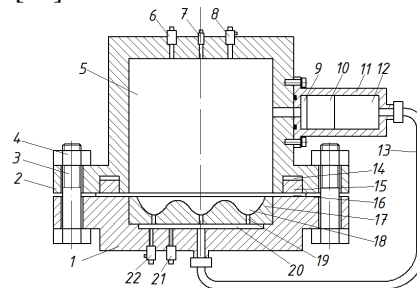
Diagram of the device for sheet gas molding: 1 - matrix holder; 2 - housing; 3 - bolt; 4 - nut; 5 - combustion chamber; 6,21 - intake valves; 7 - spark plug; 8,22 - exhaust valves; 9,12, 14,20 - cavities; 10 - piston; 11 - cylinder; 13 - pipeline; 15 - annular piston; 16 - blank; 17 - matrix; 18 - matrix cavity; 19 - channel
